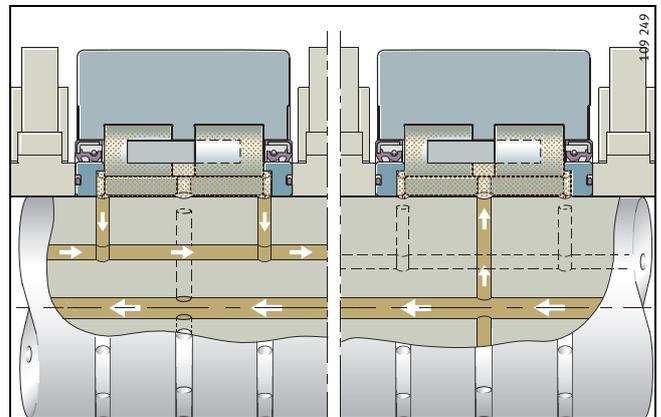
· Recirculating oil lubrication – back-up roller with rotary shaft seal
